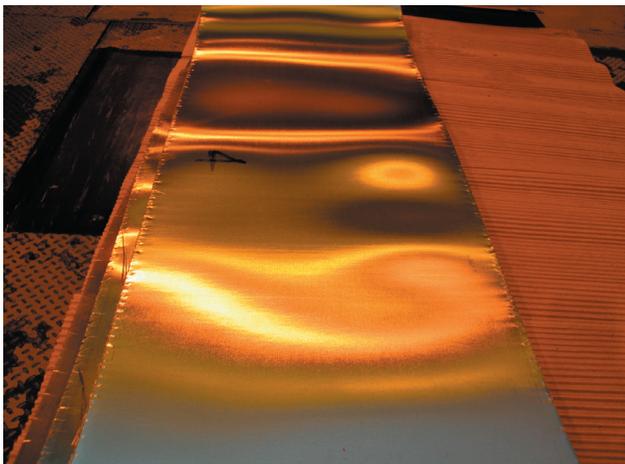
As rolled sheets approximately 45 cm wide. Note good surface finish and minimal edge cracking.
